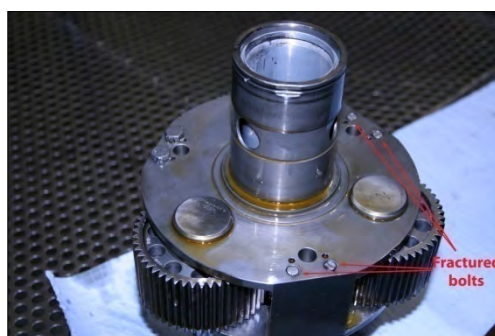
First stage reduction carrier, showing the location of the fractured bolts.
